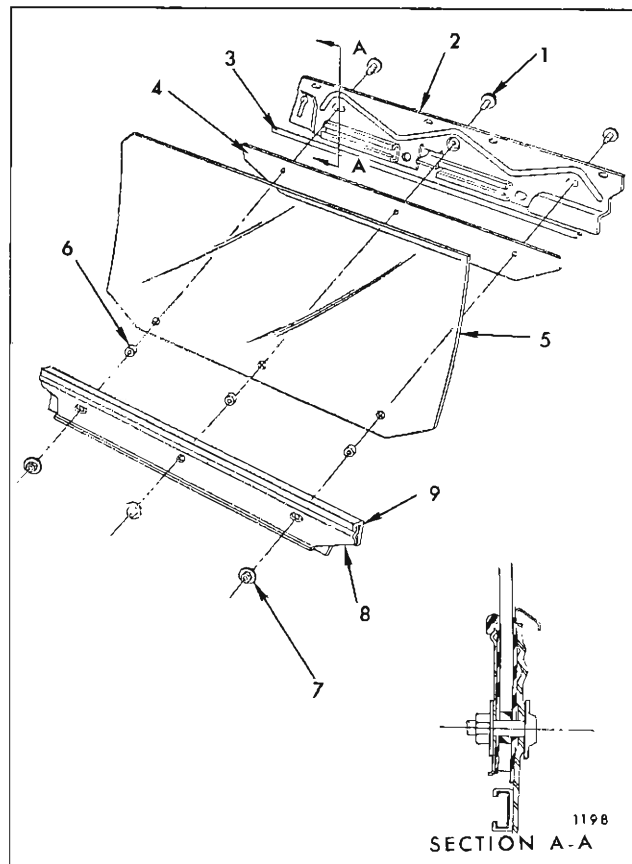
D23—Front Door Window Assembly "37" & "67" Styles
